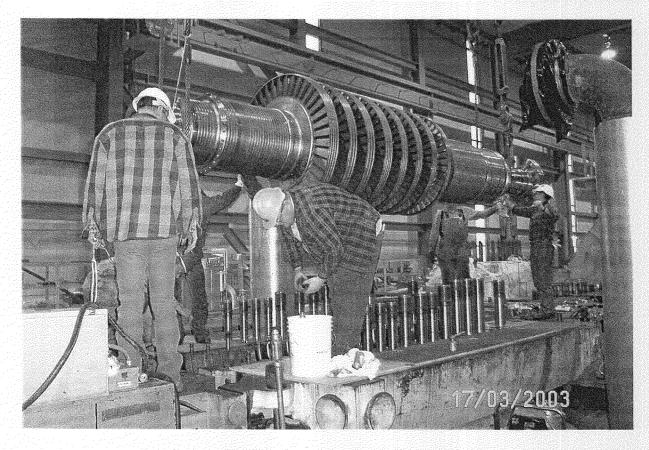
SETTING CONCENTRICITY, HP AND IP ROTORS IN LATHE
